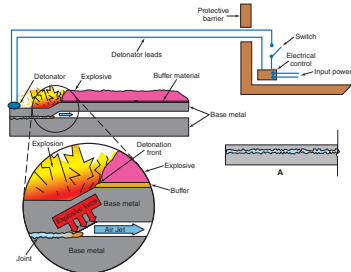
Explosion welding (EXW). A buffer material is applied to the top surface of one of the metal sheets. Energy comes from explosive material placed on top of buffer material. An igniter (detonator) is operated from back a barrier. The explosion proceeds from left to right and welds the top plate to the bottom plate almost at once, with deforming either piece of metal. The completed weld is shown at "A".
